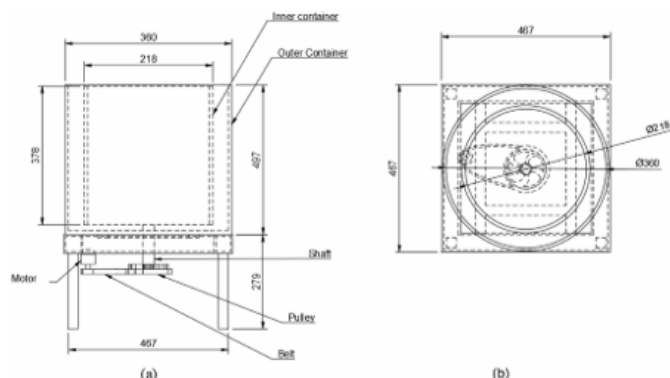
Turmeric and ginger cleaning machine a) Front View b) Top view of 2D drawings.
